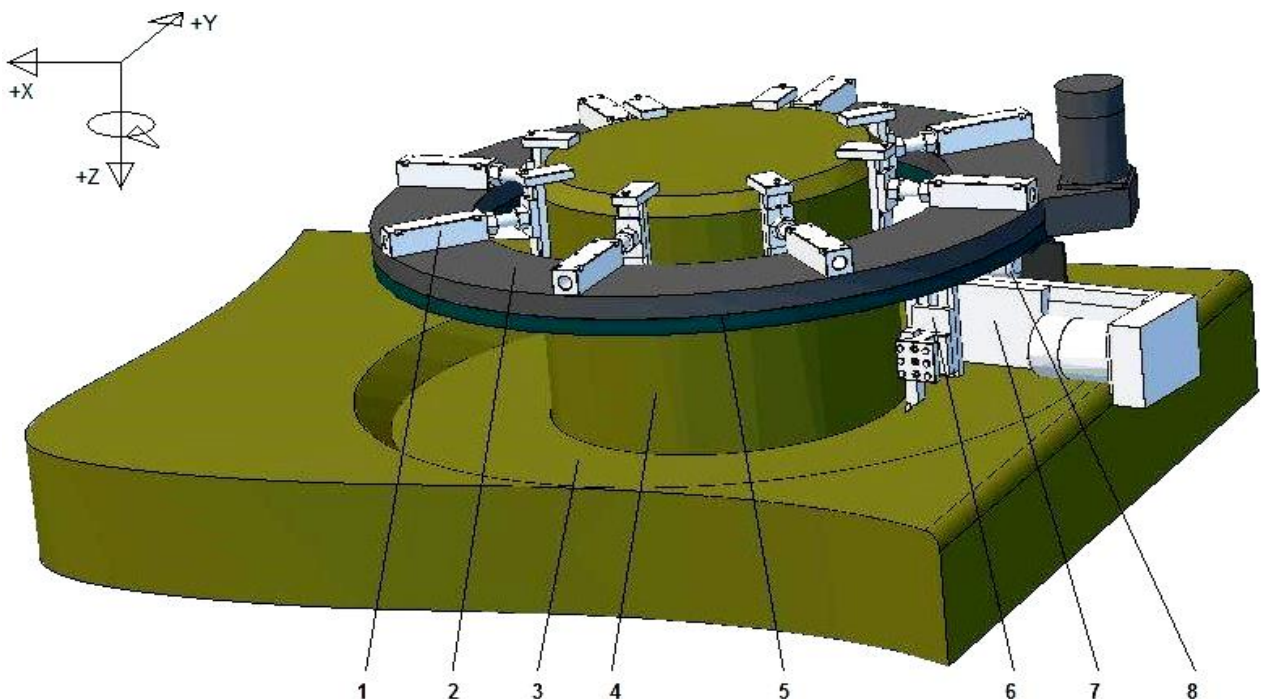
3D model of a mobile metalworking machine for face-turning
